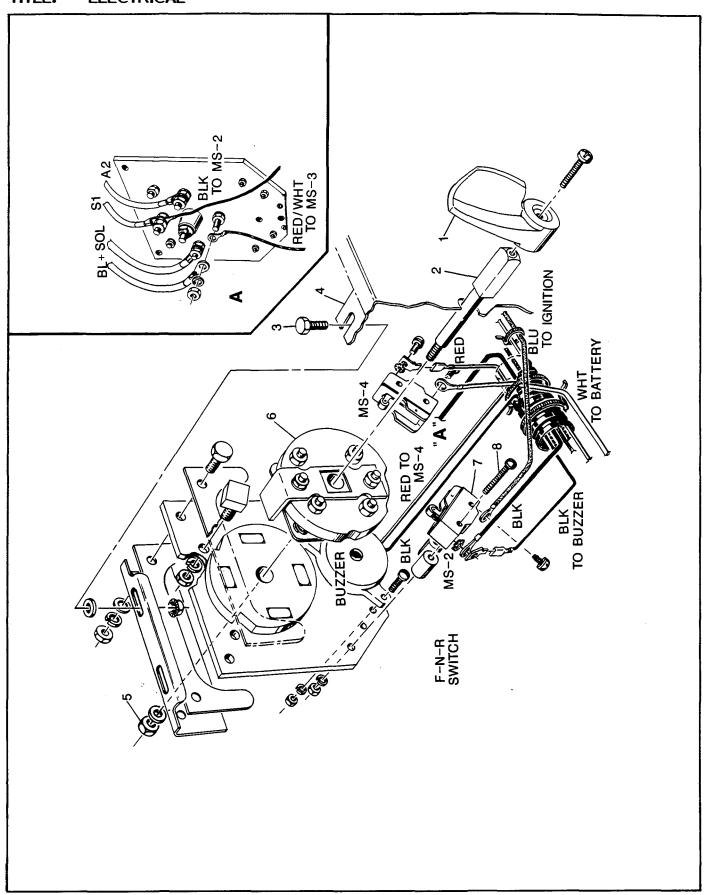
FORWARD-NEUTRAL-REVERSE SWITCH ASSEMBLY
